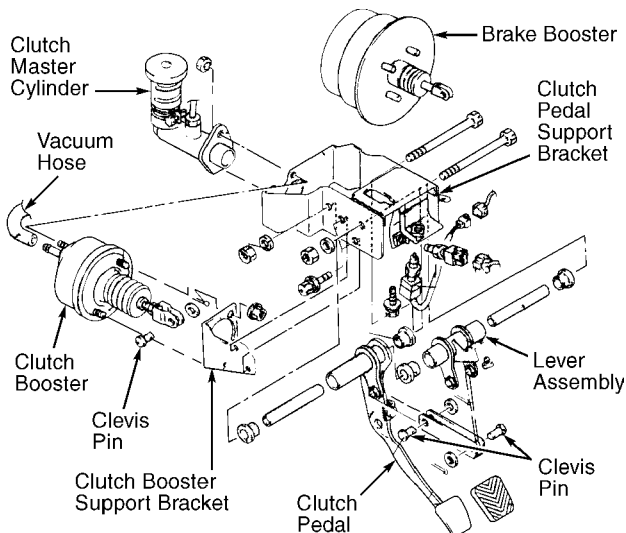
Exploded View Of Clutch Pedal & Booster (3000GT AWD)
